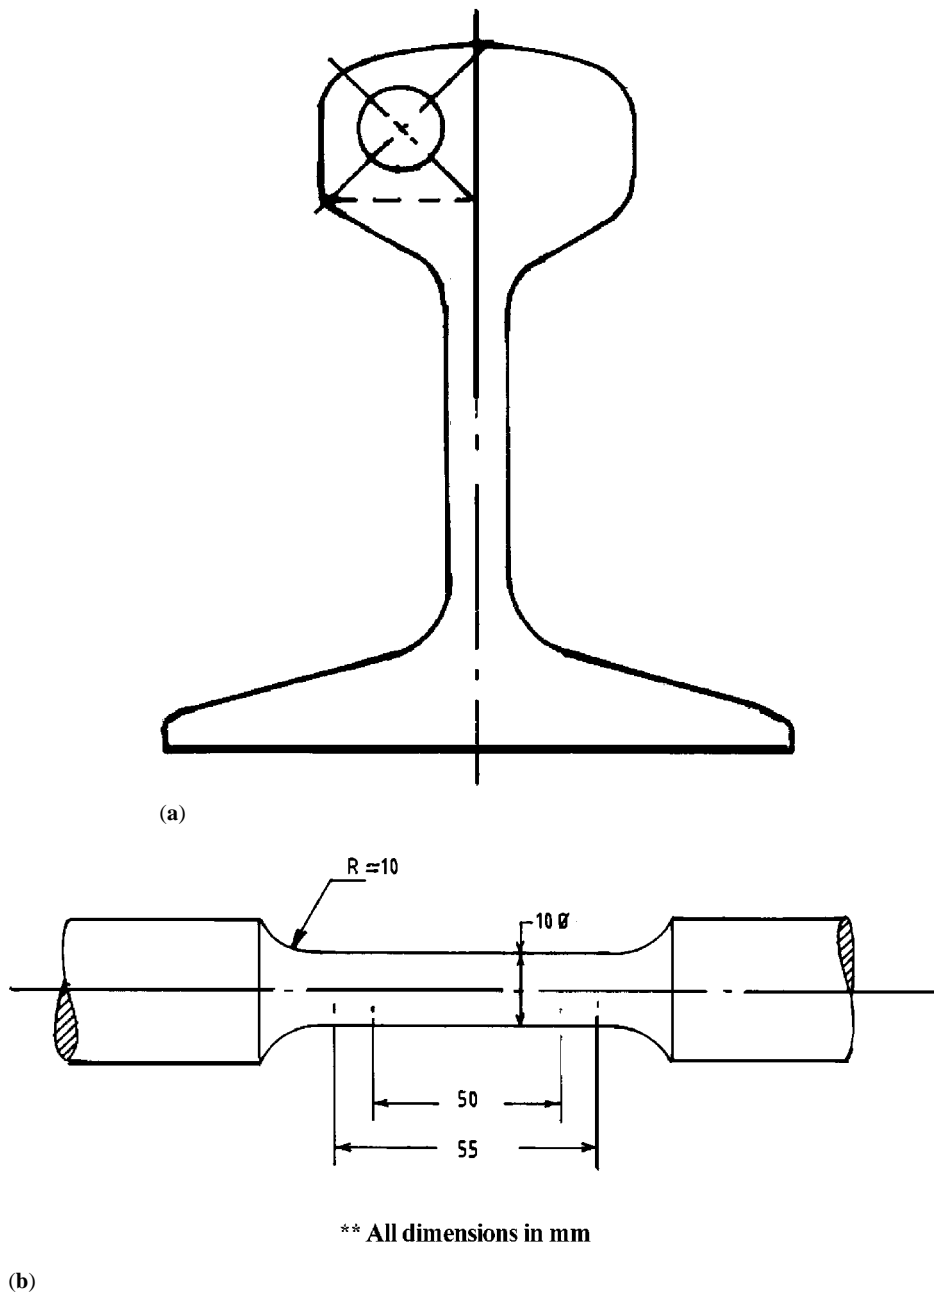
(a) Rail section showing location of tensile test piece. (b) Dimensions of standard tensile test specimen
